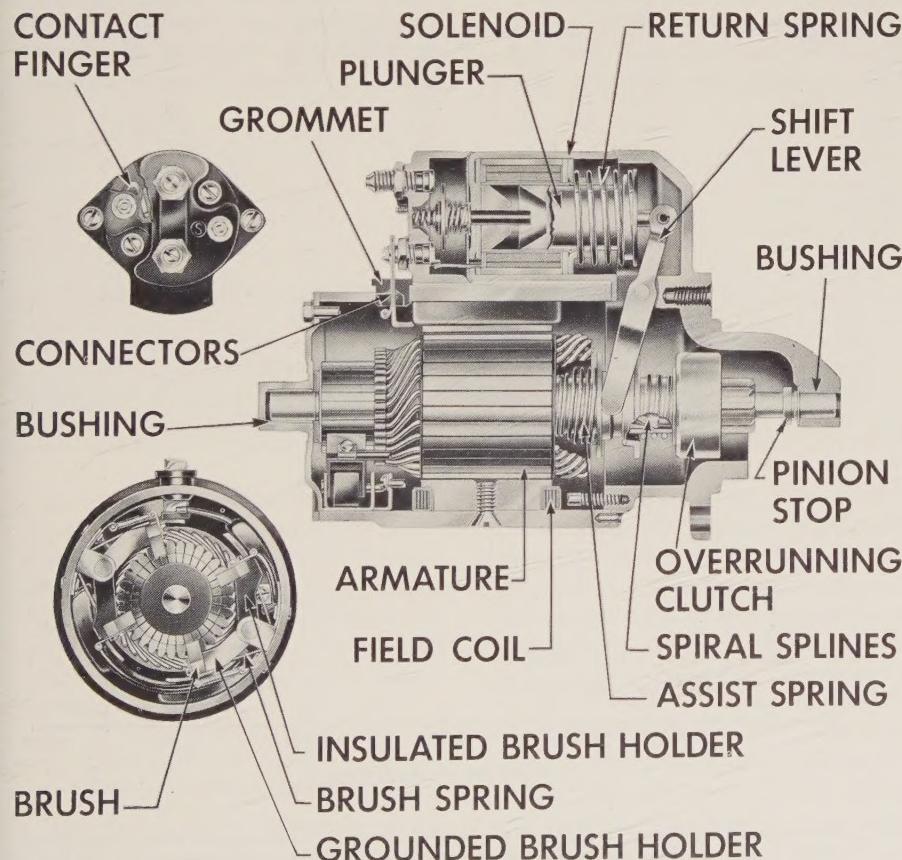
This cross-section of the 12-volt cranking motor with an enclosed shift lever shows the splash proofing protection and the connection from the field coils to the solenoid through an elastic grommet. The assist spring function is also indicated. The end view illustrates the swivel brush holders and the cantilever spring common to a pair.
